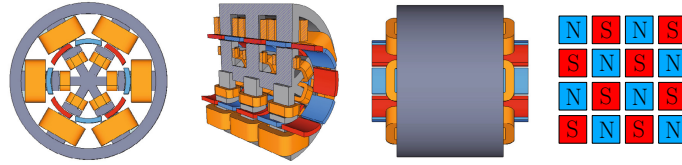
Rotary-linear actuator using a checkerboard permanent magnet array on the mover [72] with coils inside and outside the mover.
